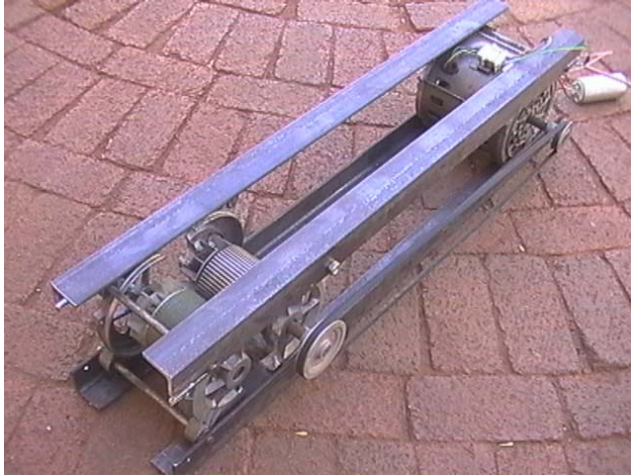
The armatures from two burnt-out washing machine motors make good rollers.
